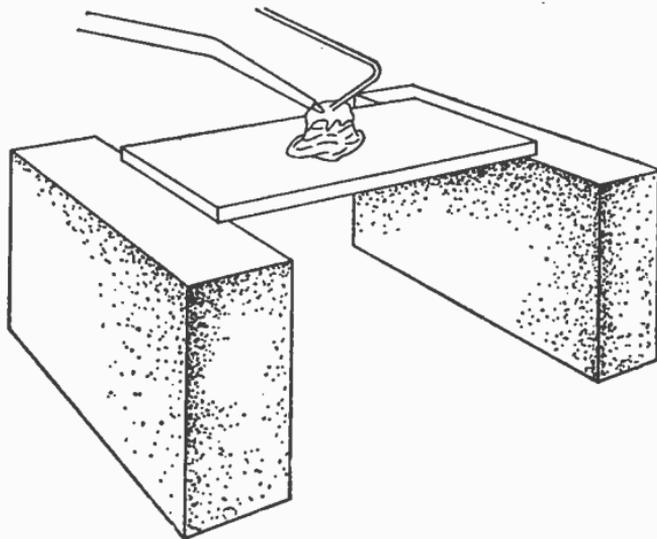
,150.—Building a mound or boss with welding rod. *Instructions:* Build up a mound of fused welding rod in the middle of a welding plate. Alternately fuse the top of the mound and drop the rod until the timing of the two operations is satisfactorily acquired. Practice in building up in this manner is advantageous also in that it is useful when finishing a weld and when necessary to provide a boss or extra reinforcement at any place.
